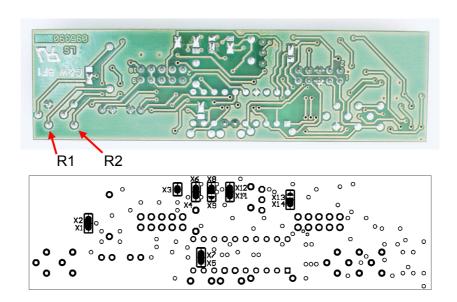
SMD Version, solder side, with corresponding drawing showing the solder bridges that replace the jumpers.
